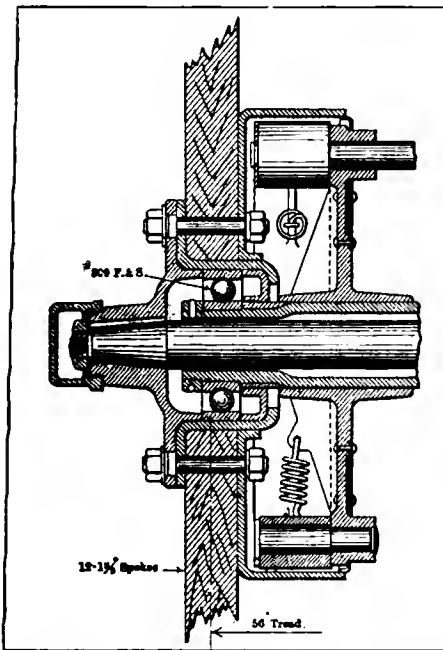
Abbott-Detroit rear axle construction showing a No. 300 F. & S. annular type ball bearing in the plane of the rear wheel.
